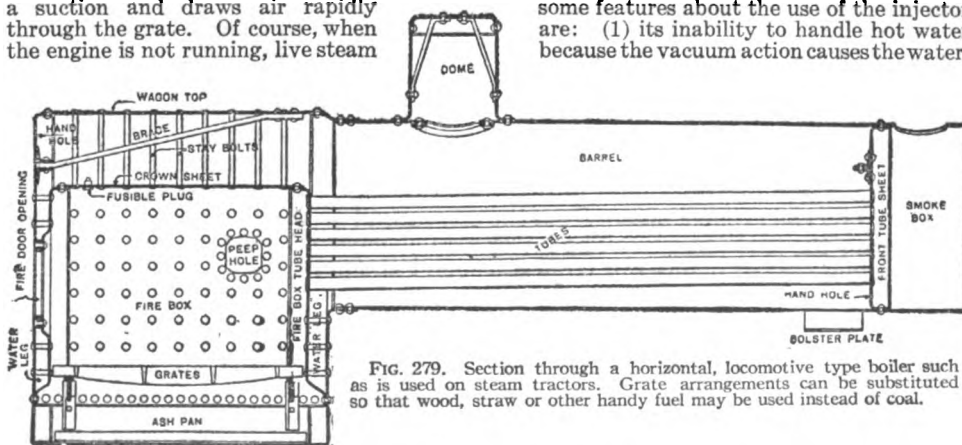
Section through a horizontal, locomotive type boiler such as is used on steam tractors. Grate arrangements can be substituted so that wood, straw or other handy fuel may be used instead of coal.
